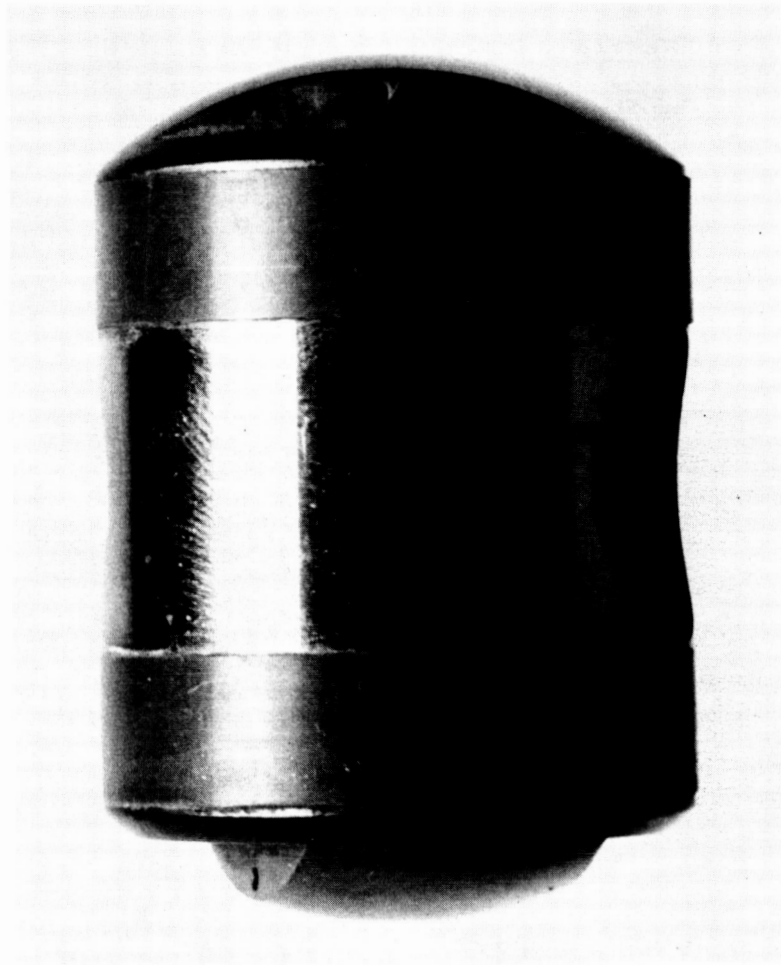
Compressor Piston Pin (After 100 hr.
